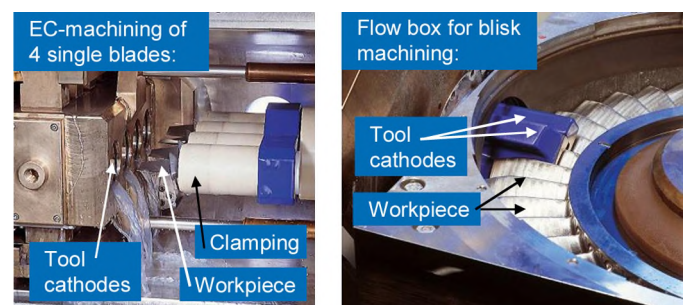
Machine set-up for blade (left) and blisk (right) manufacture (DC-ECM), Leistriz Turbomaschinen Technik LTT [104].
